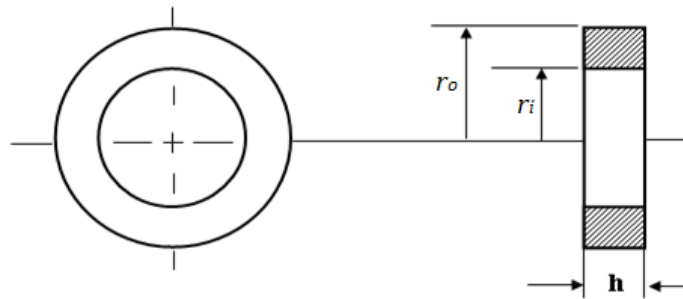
MnZn Ferrite Ring Core Geometric Dimensions.
